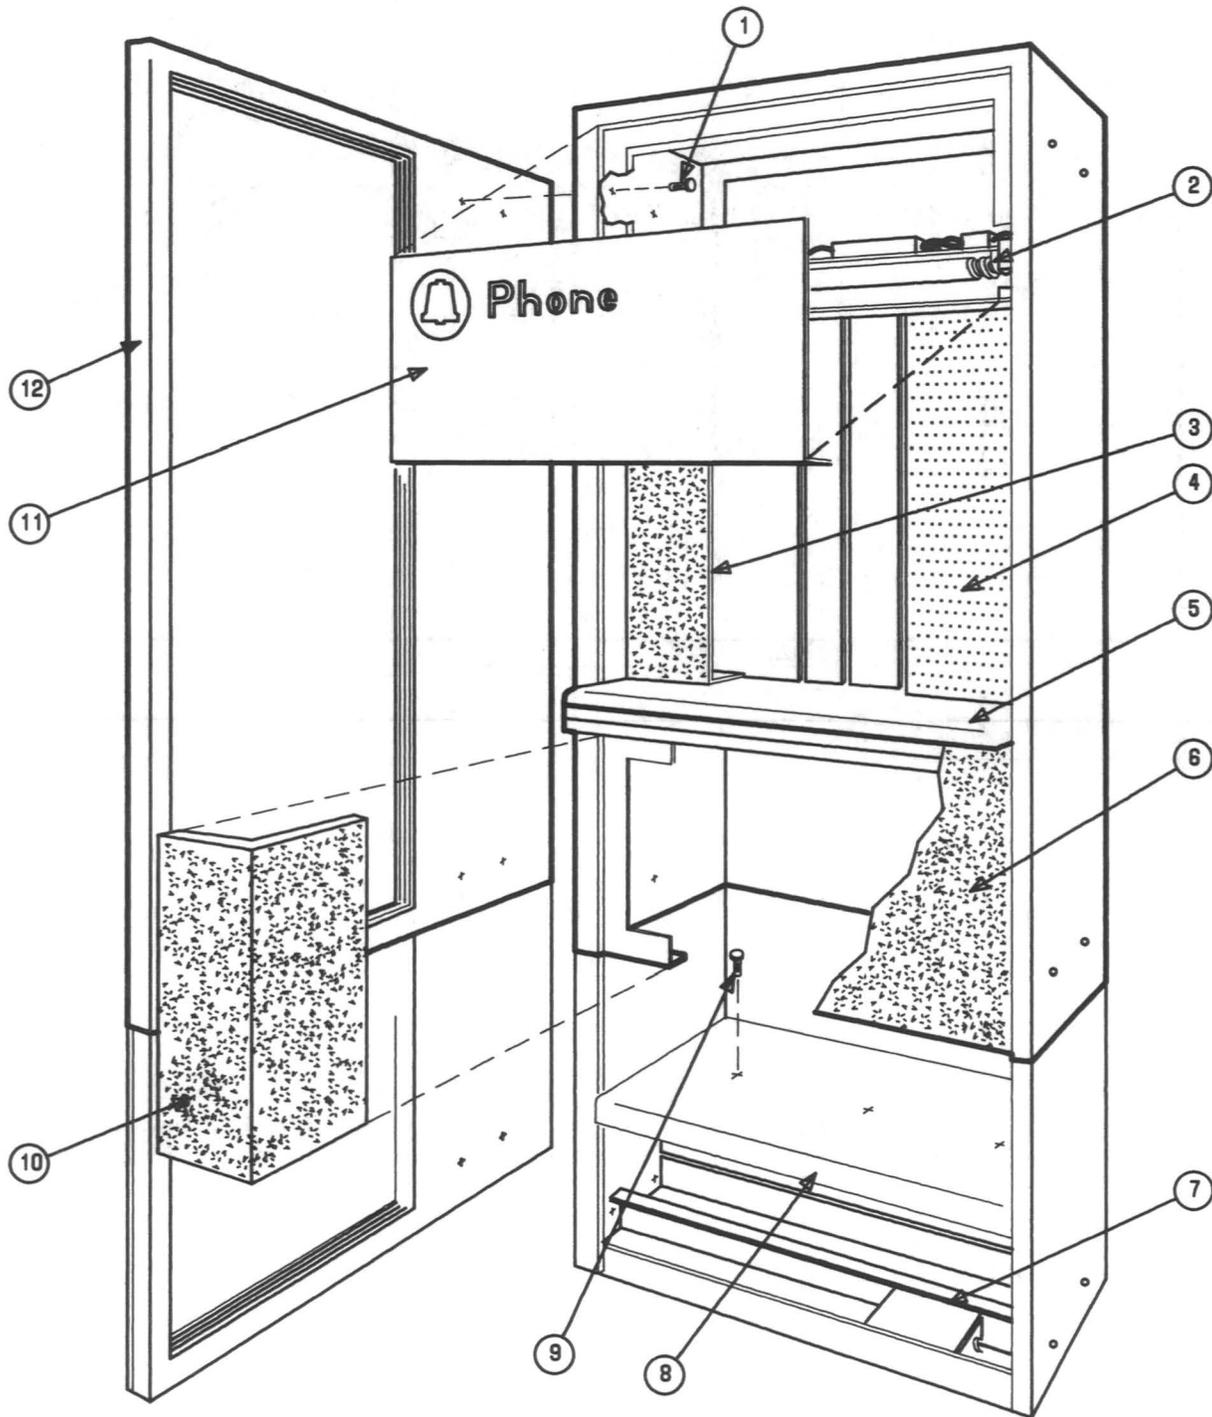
Assembly/Disassembly of Parts (Sheet 1 of 2)
